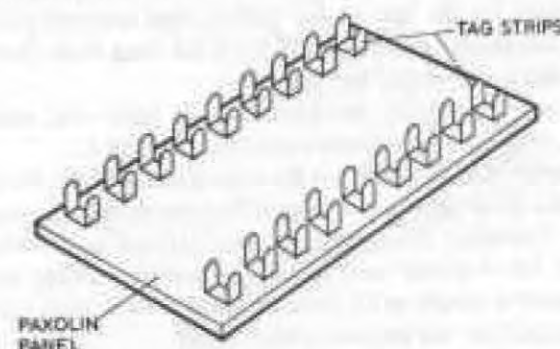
Tag boards can be made by mounting tag strips on a Paxolin panel, or bought ready-made.
